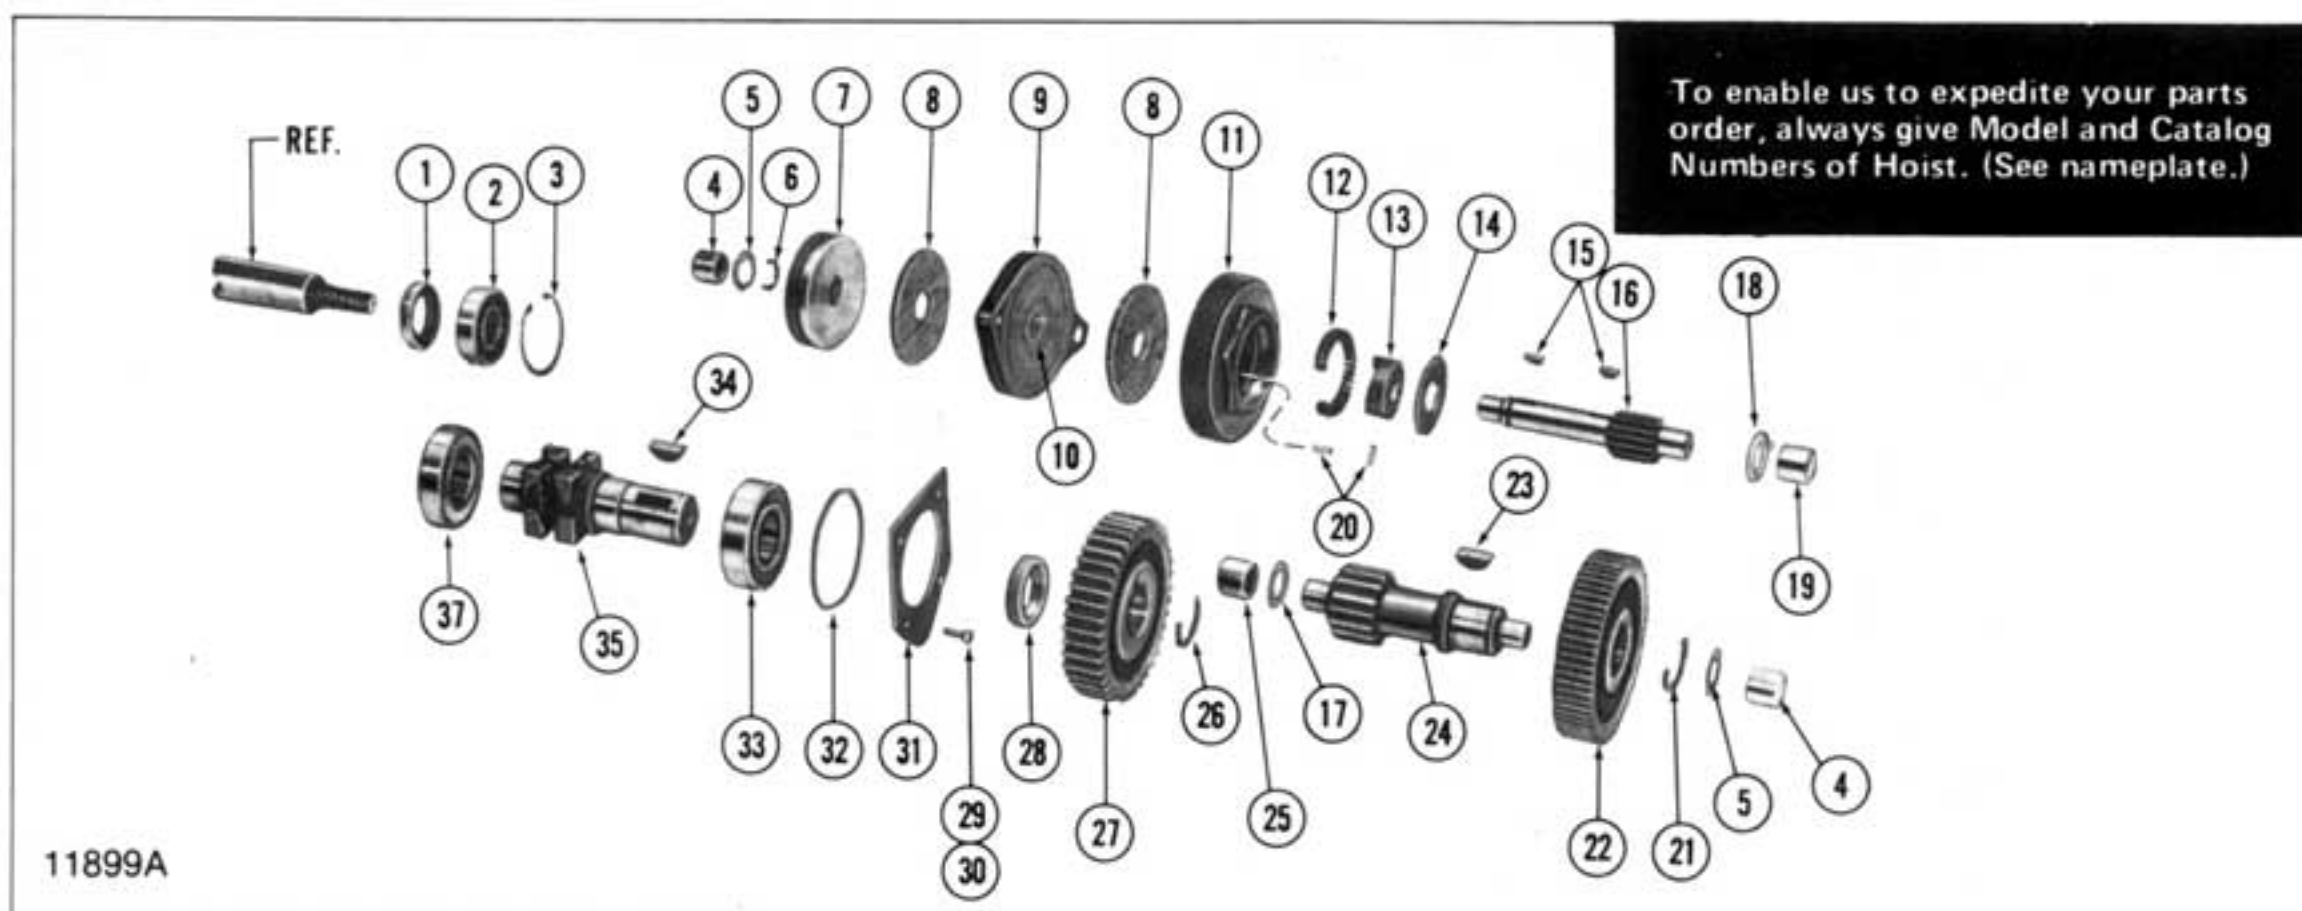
GEARING AND LOAD BRAKE PARTS.
